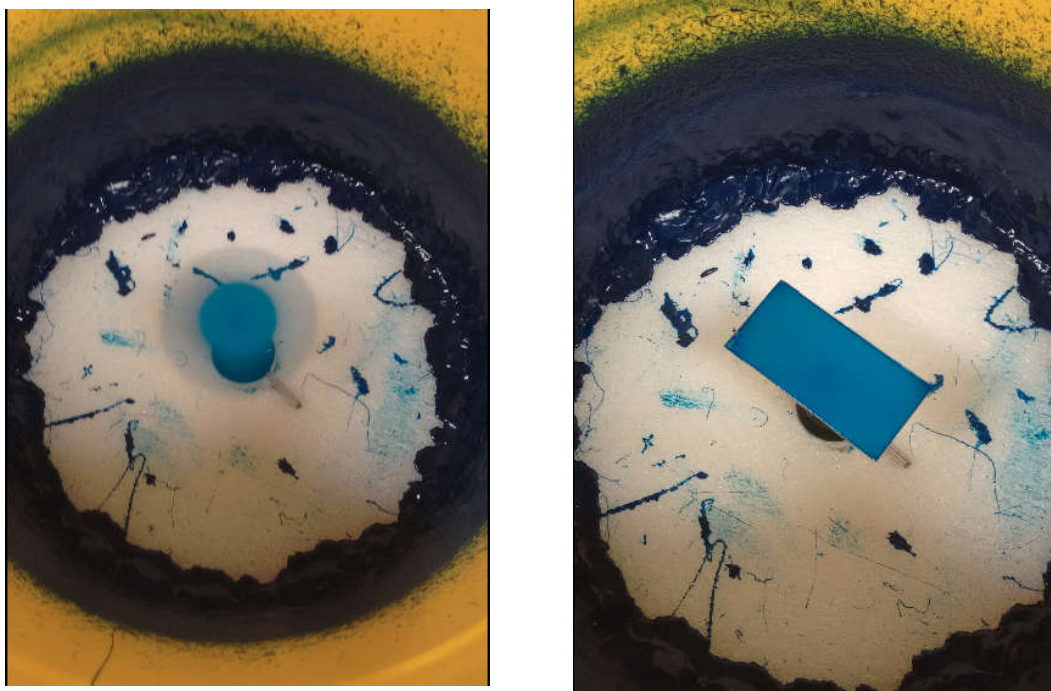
Preparation of the board with Liquid Photoresist, (a) Application of Liquid Photoresist on the board, (b) PCB board ready to be exposed to the UV.
